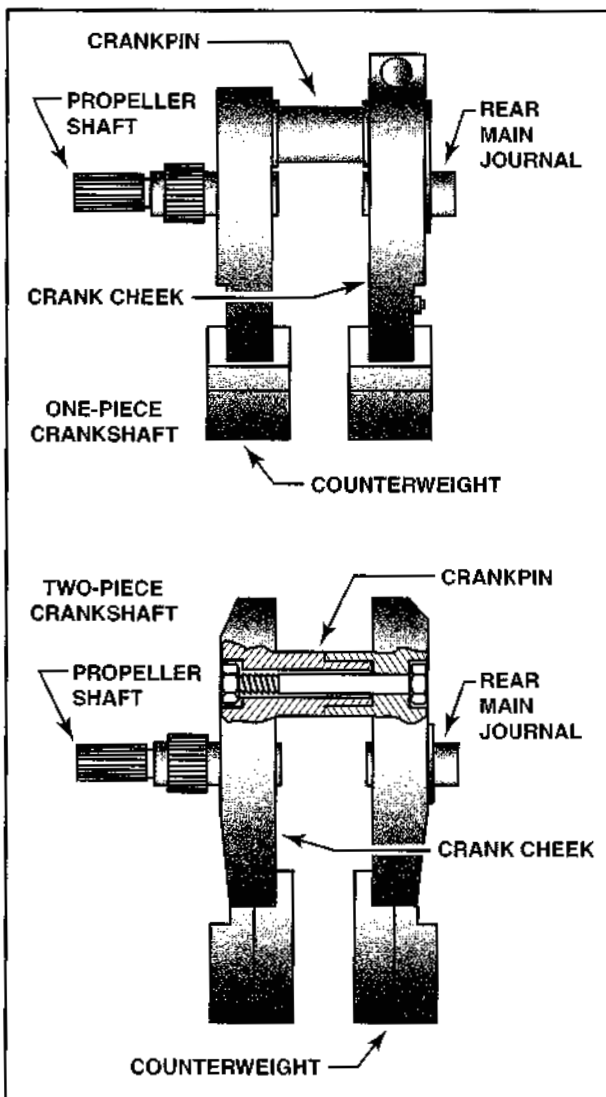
A one-piece, single-throw crankshaft is cast as one solid piece. However, a clamp type, two-piece crankshaft is held together by a bolt that passes through the crankpin.
